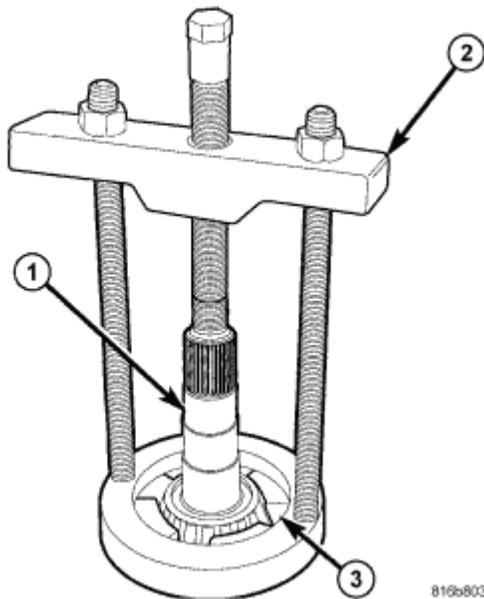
Removing Rear Pinion Bearing From Pinion Shaft With Puller/Press C-293-PA And Adapters C-293-47
